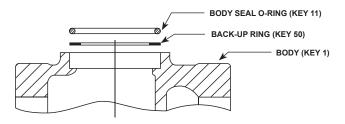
Expanded View of the Body Area Showing the O-ring and Back-up Ring Placement
